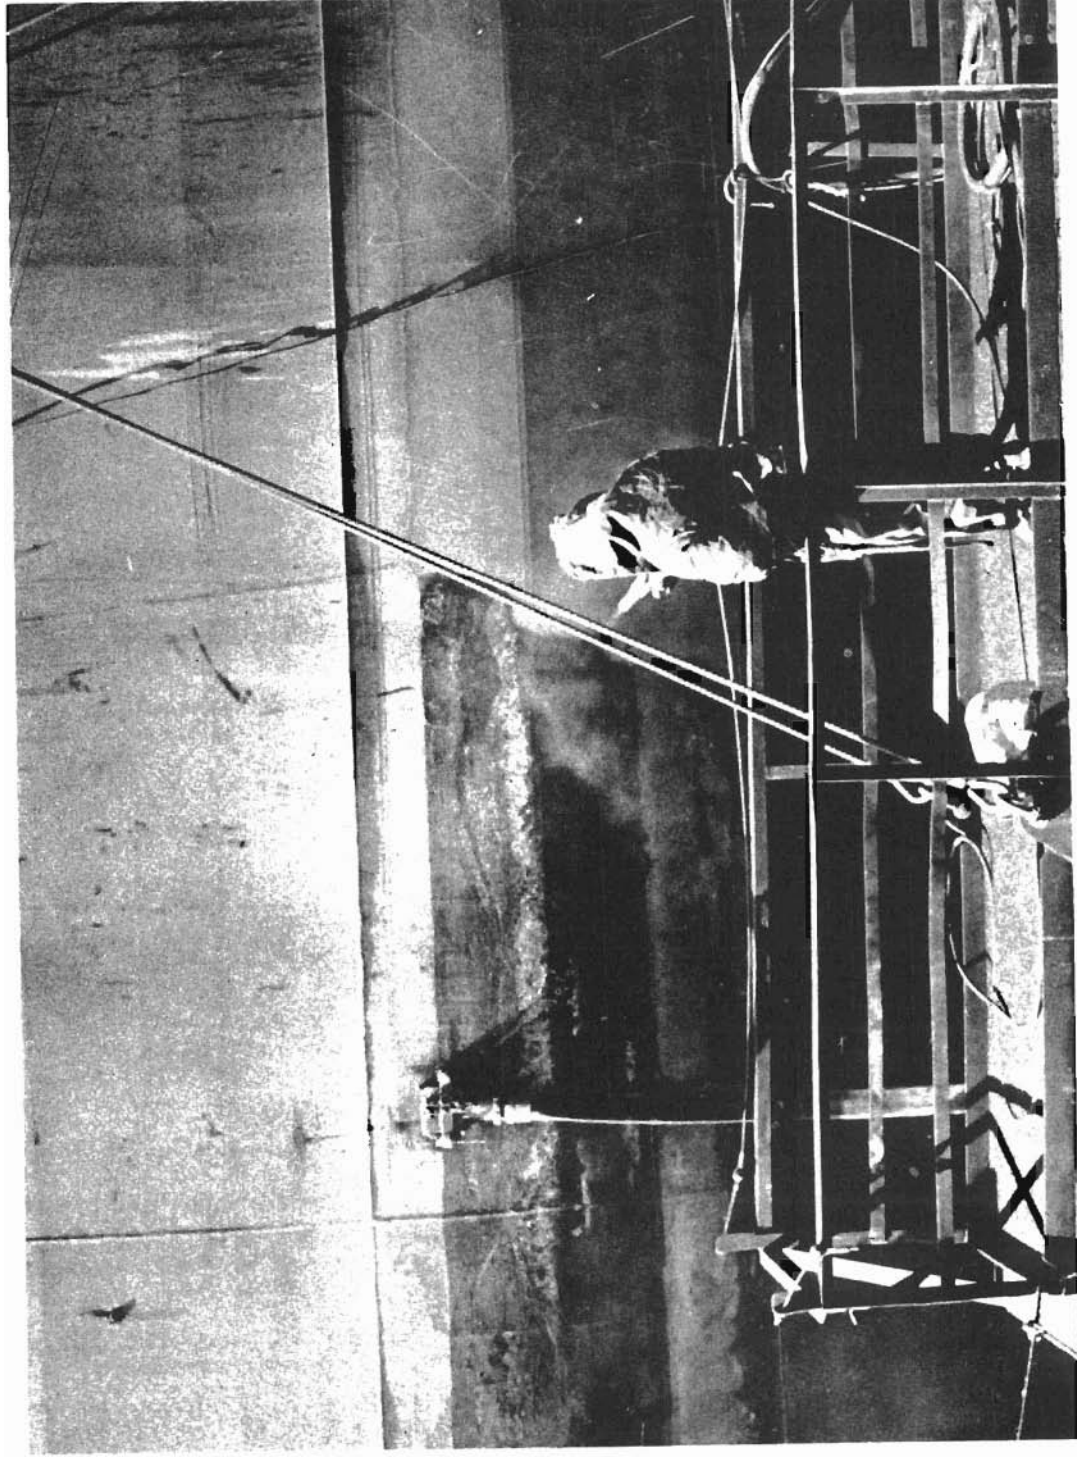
PORTABLE BLAST CLEANING MACHINE, HAND-HELD NOZZLE, CLEANING SHIP IN DRYDOCK (Installation p-41)
